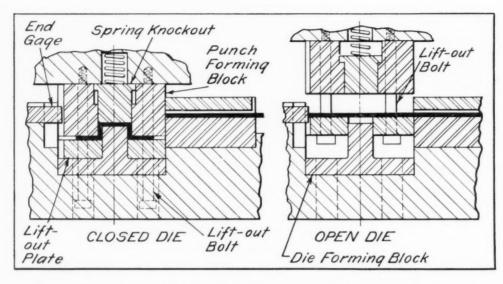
Lift-out Type of Knock-out Incorporated in Cutting-off and Forming Die
